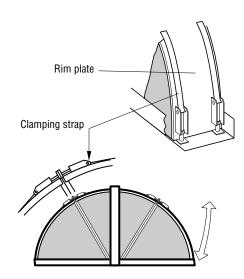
4. Remove the rim plates and clamping straps. Keep the bolts in a safe place.
